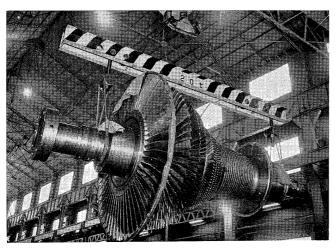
Turbine rotor (for a ceramic plant) 30,000 kw condensation turbine 42 kg/cm²g 435°C 724 mmHg 3600 rpm
